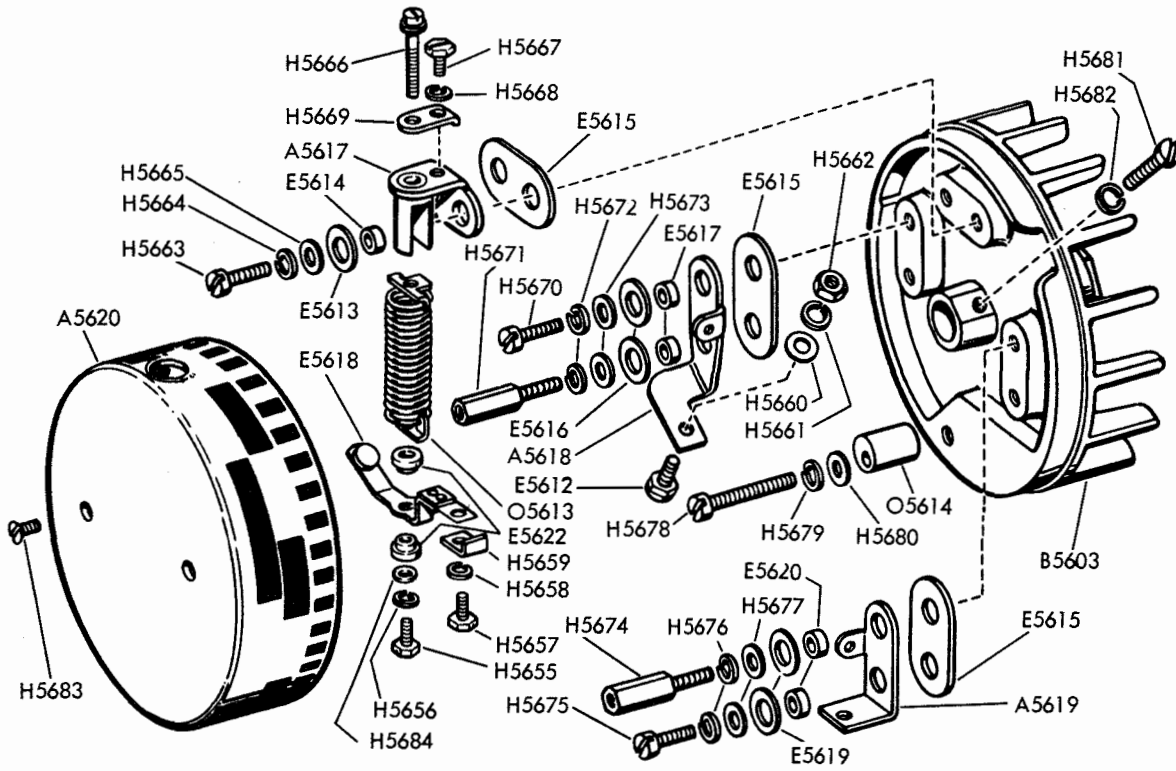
Governed Motor Unit (TT-274/UG and TT-292/UG)
